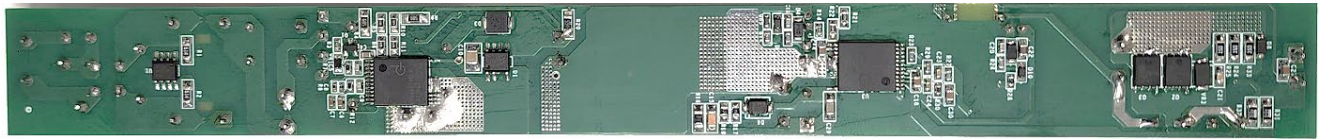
Populated Circuit Board Photograph, Bottom Side
